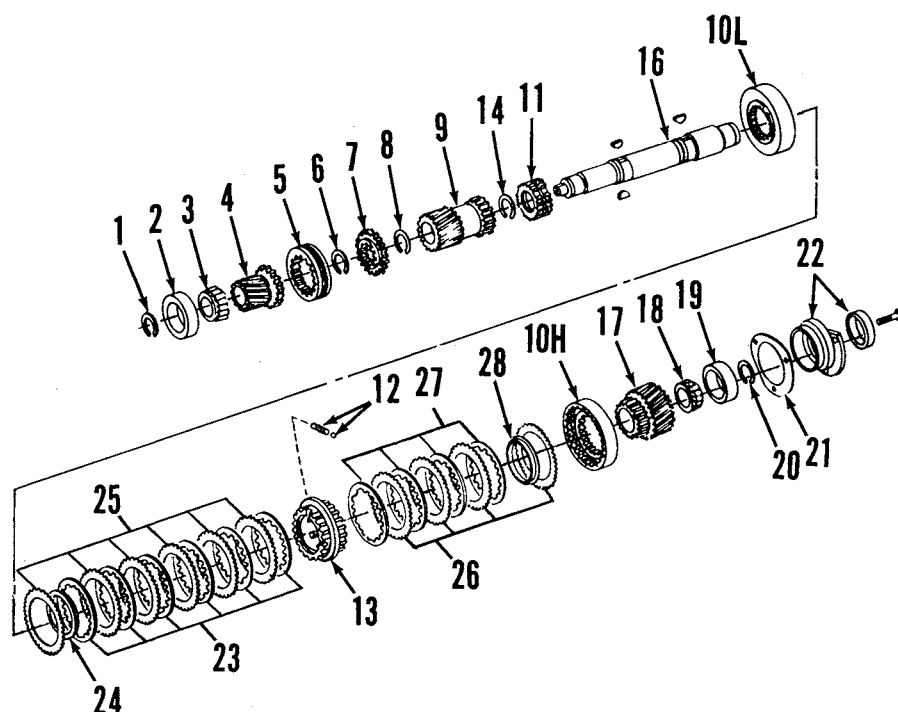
A—Exploded view of transmission drive shaft assembly used on Model 4650. Refer to Fig. 132 for legend.
